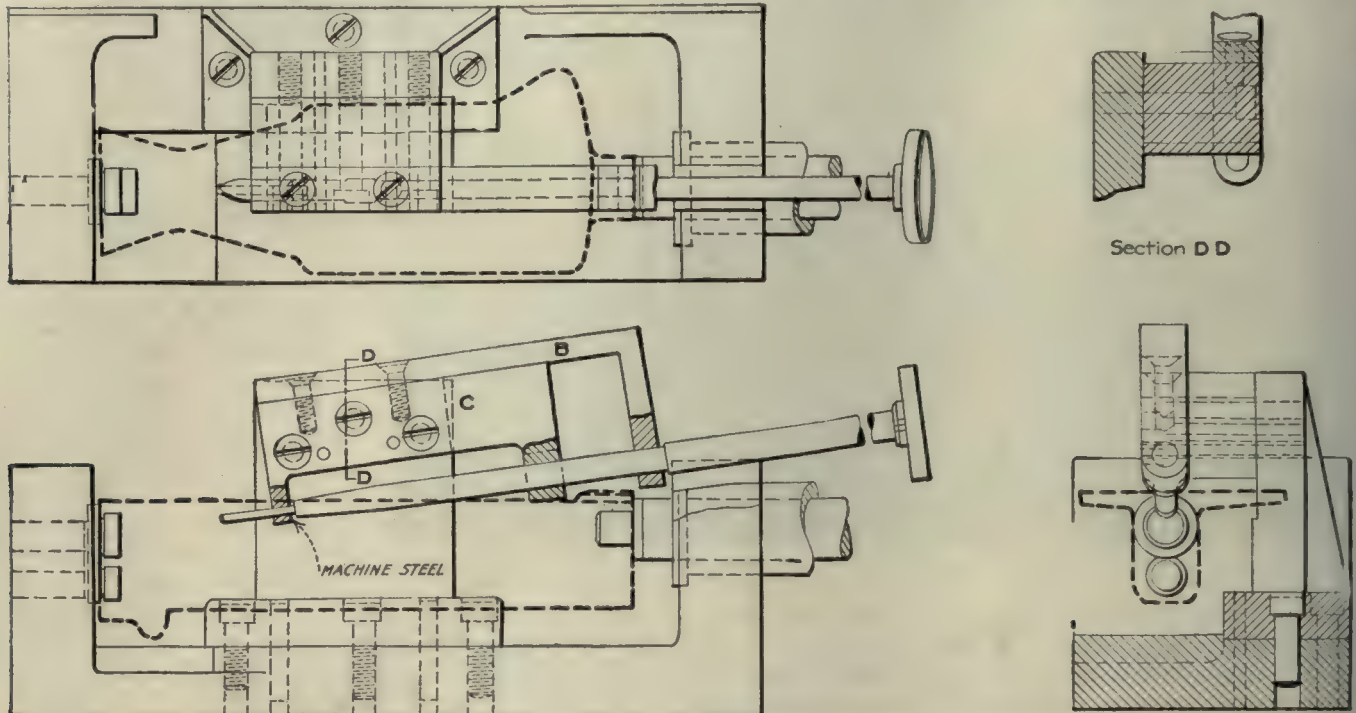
HAND REAMING FIXTURE FOR CARTRIDGE GUIDE WINGS
